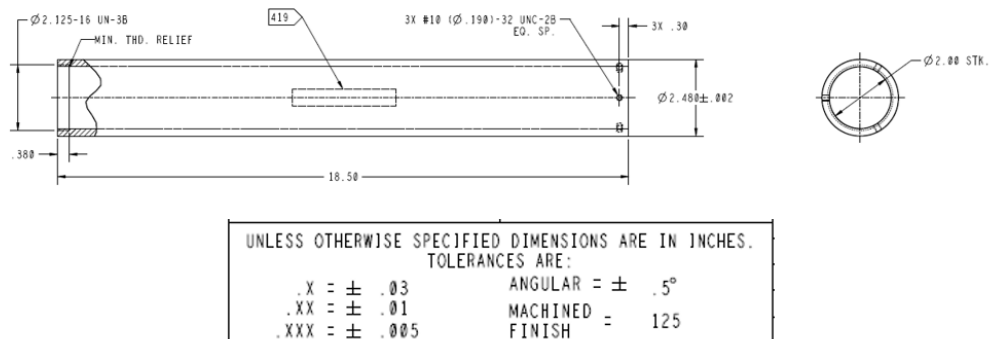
Engineering Drawing (128Y-1721373-D1) of the Al Alignment Tube (Dimensions in Inches).
